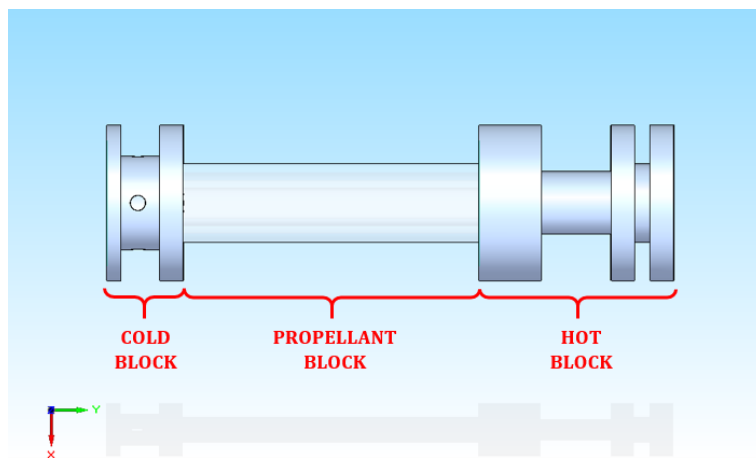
Thruster assembly CAD view: cold block, propellant block and hot block
